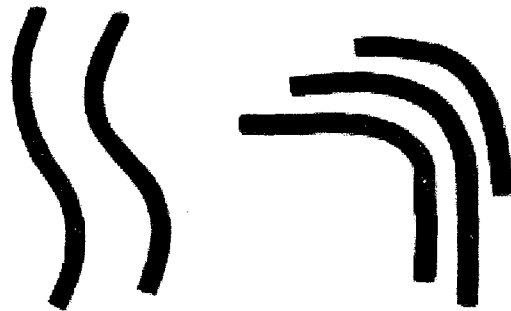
A view of experimental results of the products of curved cylindrical tubes that can be manufactured by the extrusion bending process
